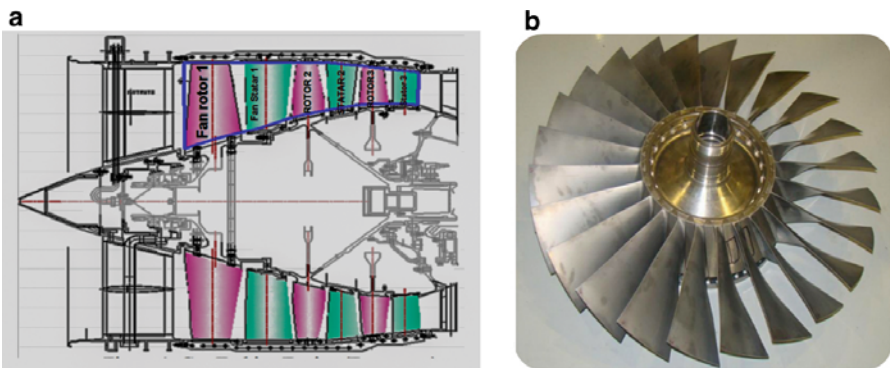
a Third-stage axial fan of a gas turbine engine. b First-stage fan rotor blade disc
